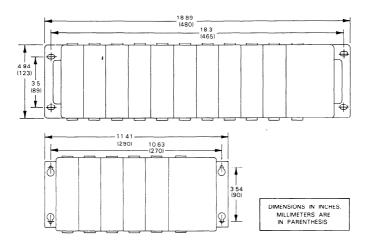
MOUNTING DIMENSIONS FOR 5 AND 10 SLOT RACKS
